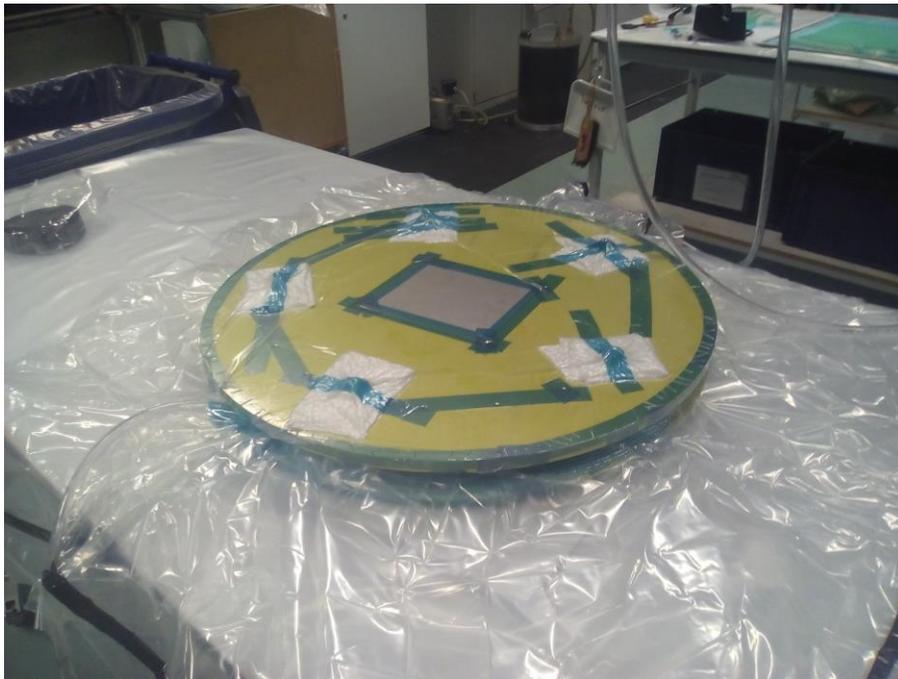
Setup of the product after placing the fibres in the mould, bagging the mould and applying the vacuum.
